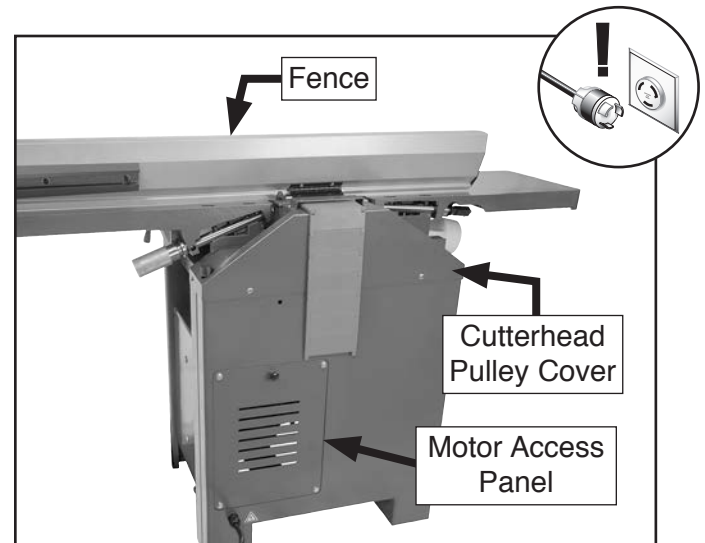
Location of fence, cutterhead pulley cover, and motor access panel.
